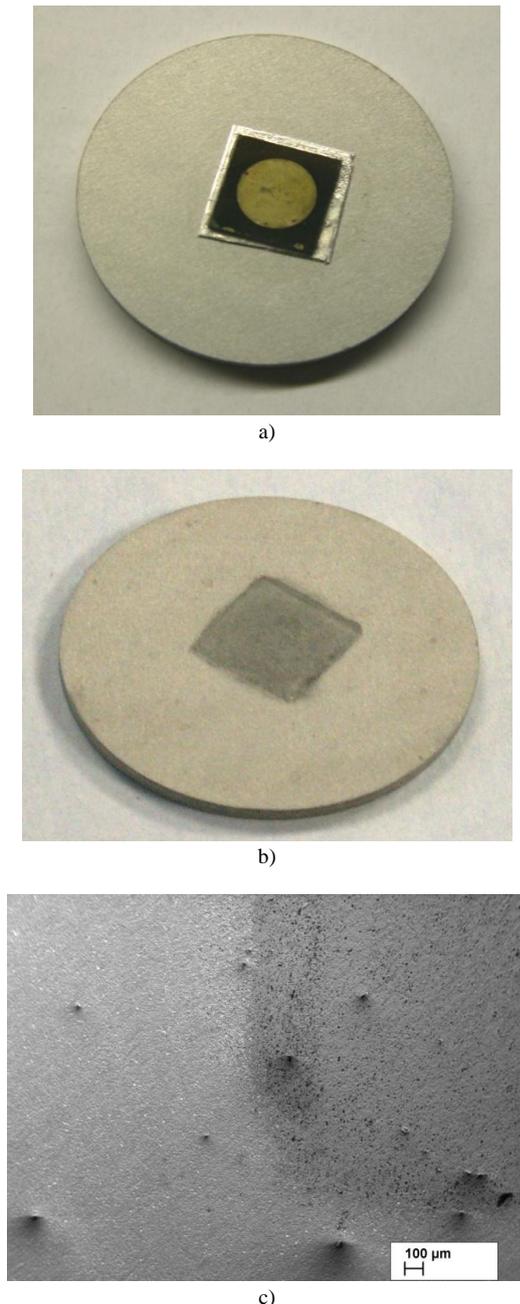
The view of the welded chip (a), tungsten electrode after etching (b) and tungsten electrode surface under the great magnification (c) (secondary electron image).
